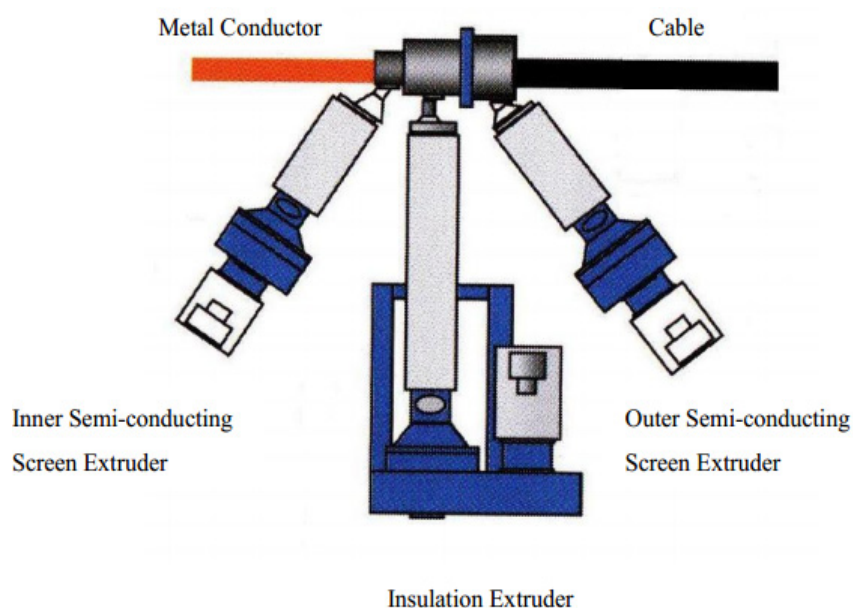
The triple extrusion stage for the extruded cable [5].
